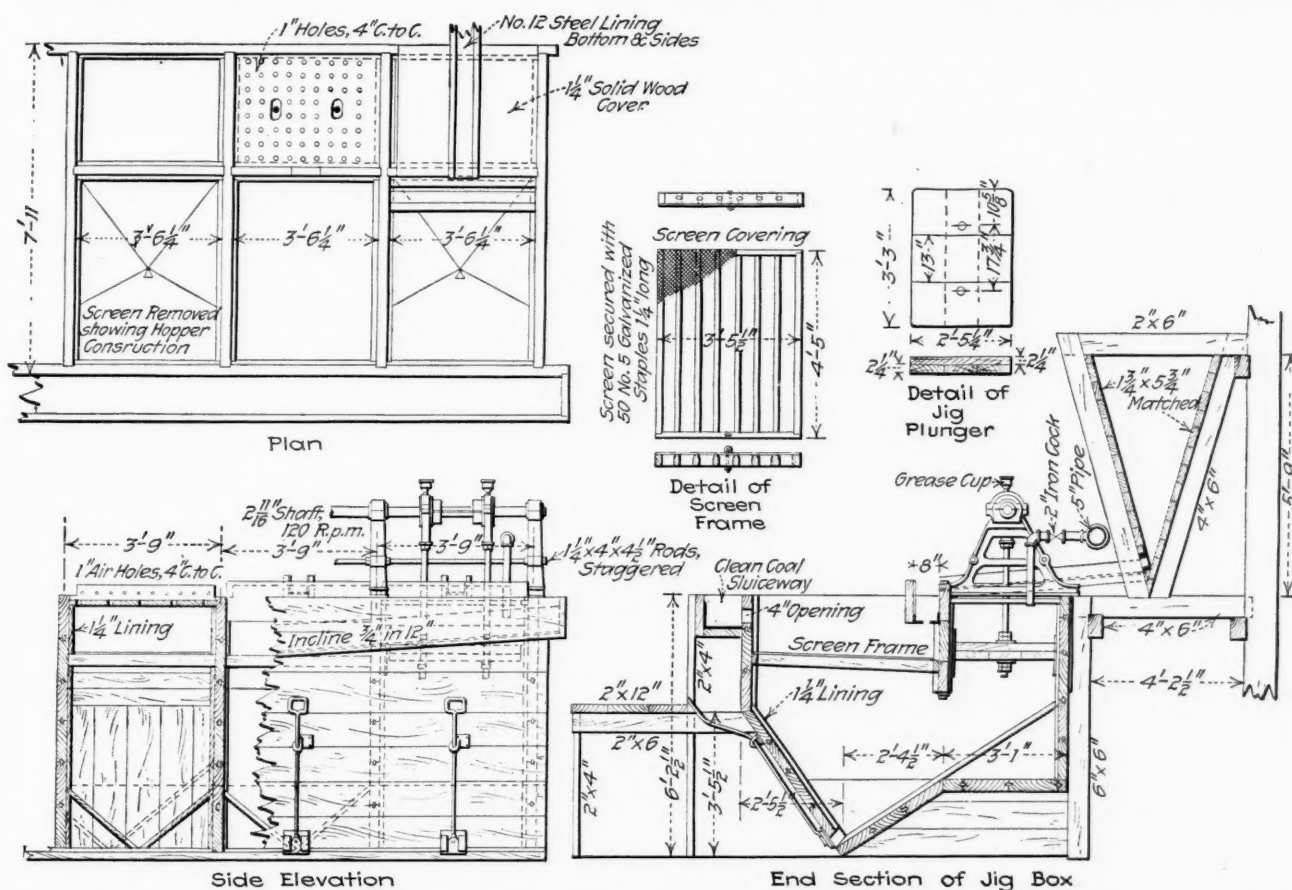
DETAILS OF A FINE-COAL JIG, WITH FELDSPAR BED, BUILT OF TIMBER
